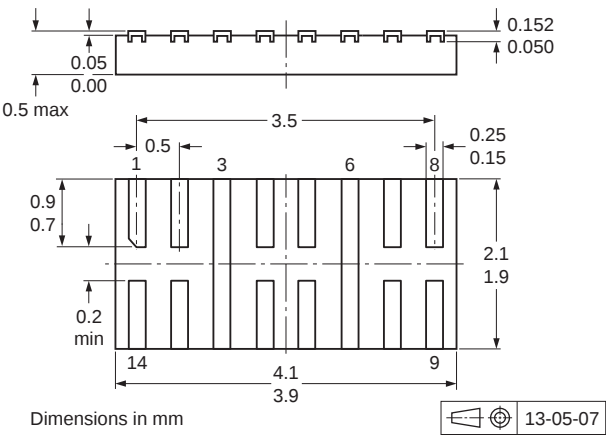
Package outline DFN4020-14 (SOT1334-1)
